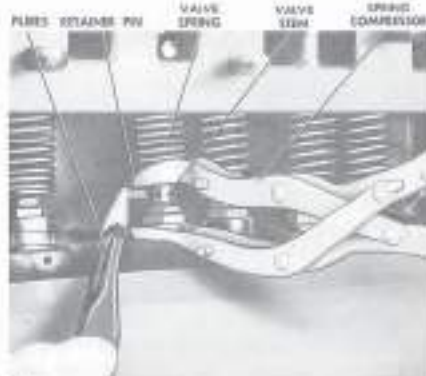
Removing or Installing Intake Valve Retainer Pin
